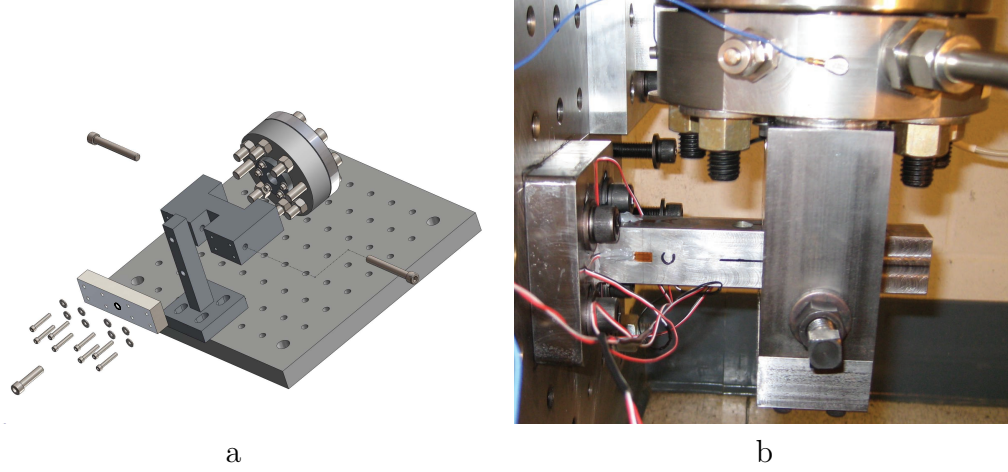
Force link and cantilever beam used to to measure forces at lower east end of ES1. a) exploded view b) side view showing strain gages.
